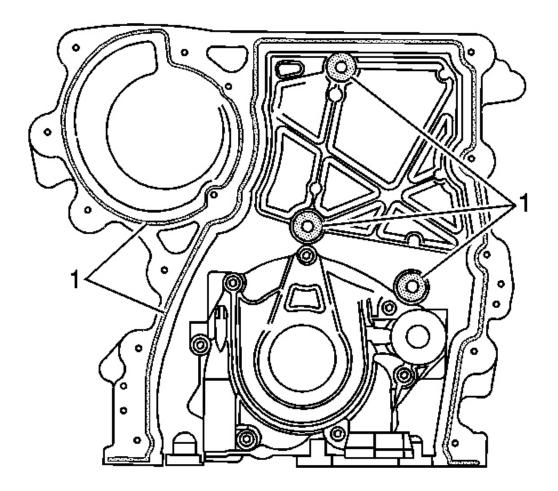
Applying Sealant To Engine Front Cover Courtesy of GENERAL MOTORS CORP.
